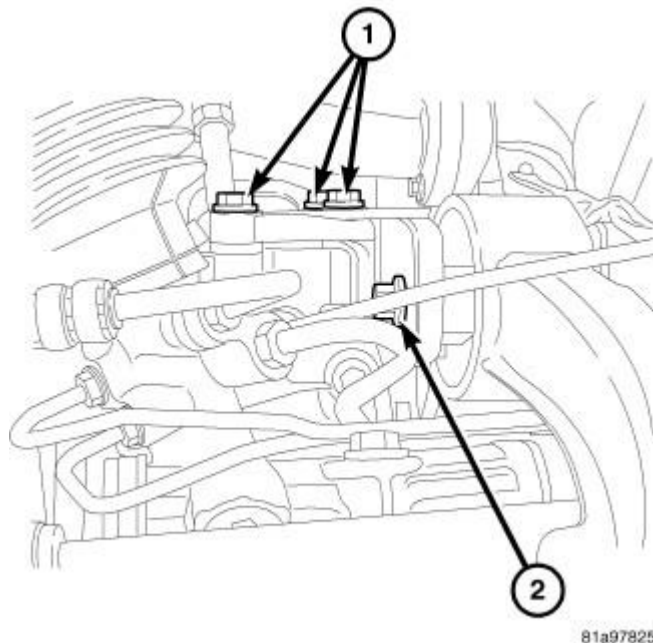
Identifying Rear Mount Bracket-To-Transaxle Case Bolts
